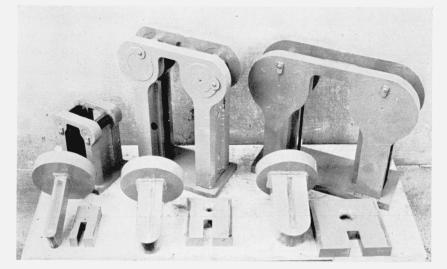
Photograph of bending jigs used for ¼-, ¼-, and ¾-in. specimens, showing all essential parts of each jig.
